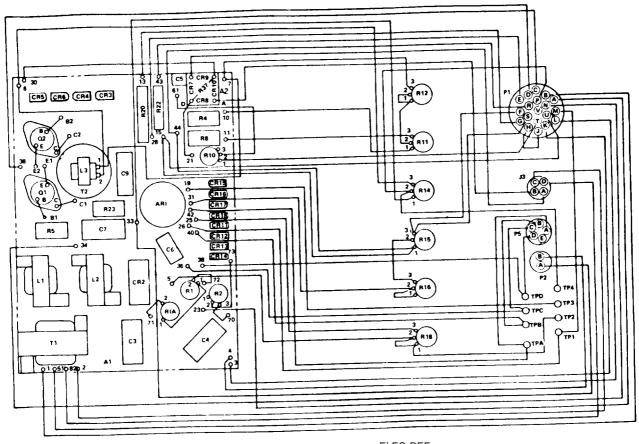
Electro-Hydraulic Governor Control Unit Printed Circuit Board
